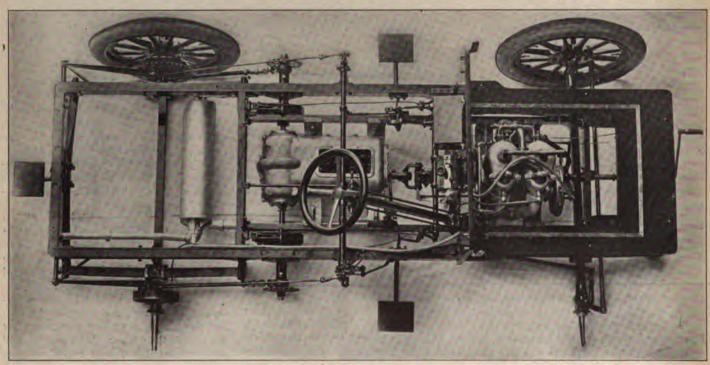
Plan View of Chassis of Acme Touring Car.
